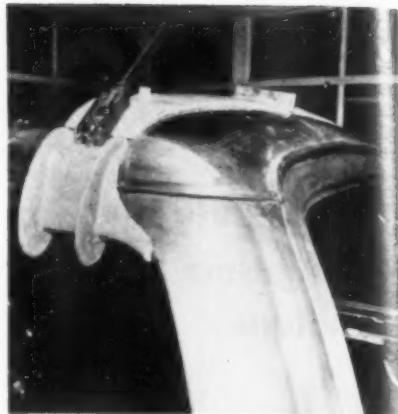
Welding fixture of cast epoxy is typical of prototype tools. Often this type can be transferred to the production line.
